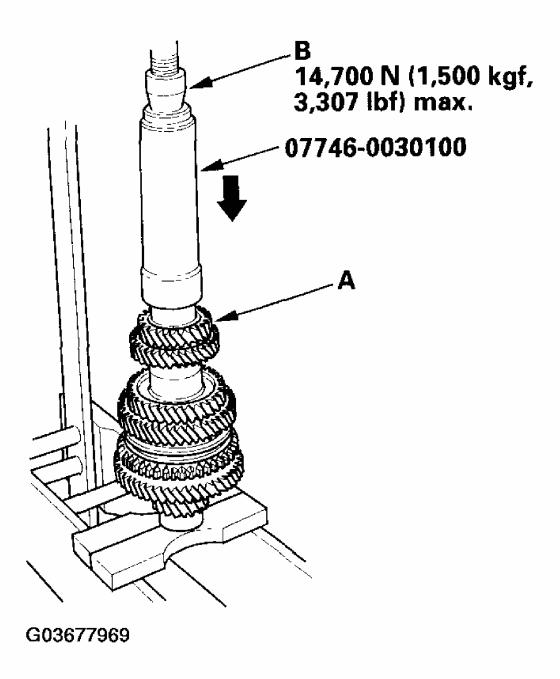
Installing Fifth Gear Courtesy of AMERICAN HONDA MOTOR CO., INC.
